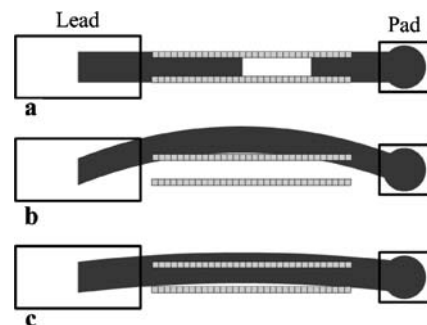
c Illustration of the inspection zone of a bonding wire with defects. a Illustration of a broken wire. b Illustration of a shifted wire. c Illustration of a wire that has shifted slightly, but is still located within tolerance
